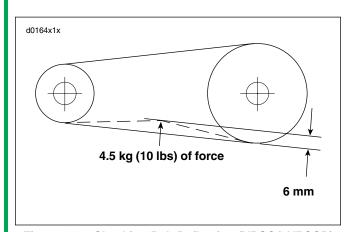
Checking Belt Deflection (VRSCA, VRSCD)
